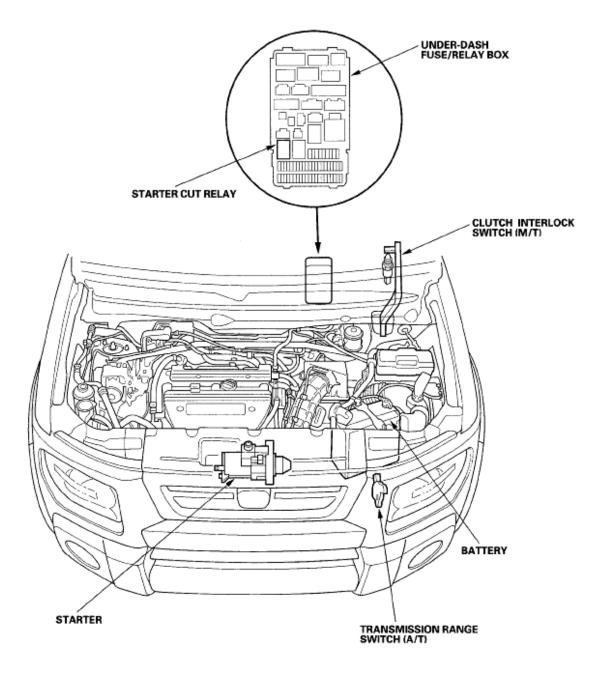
Identifying Starting System Component Location Courtesy of AMERICAN HONDA MOTOR CO., INC.
